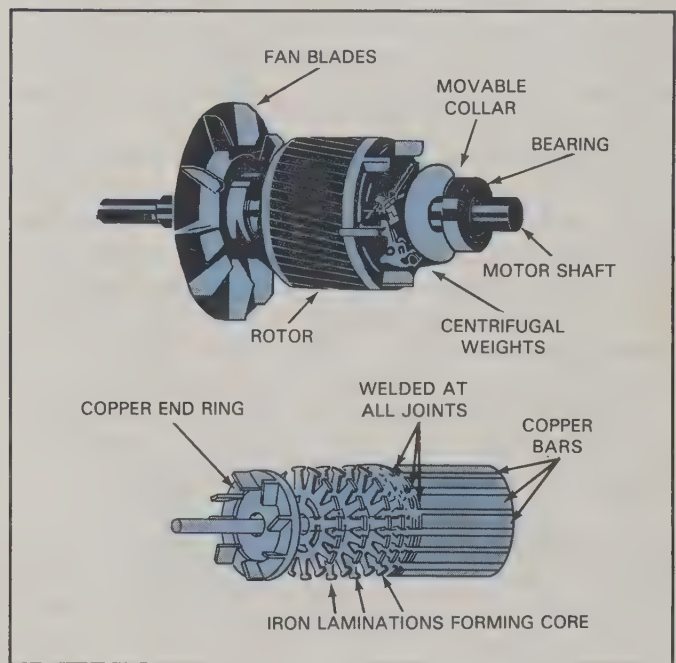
A squirrel cage rotor consists of a laminated iron core with copper bars inserted in it. The core surrounds the motor shaft. Construction is shown at bottom.
